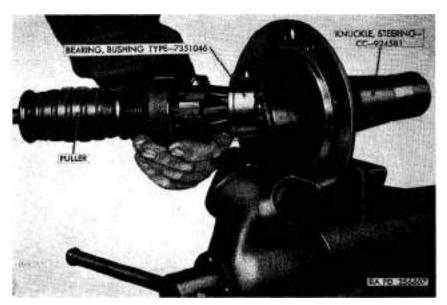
Removing bushing-type bearing from steering knuckle with a puller.
